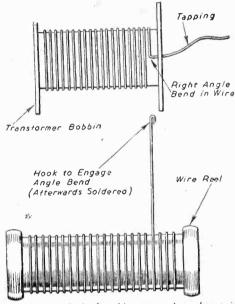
Method of making a tapping when using a heavy gauge of wire.
